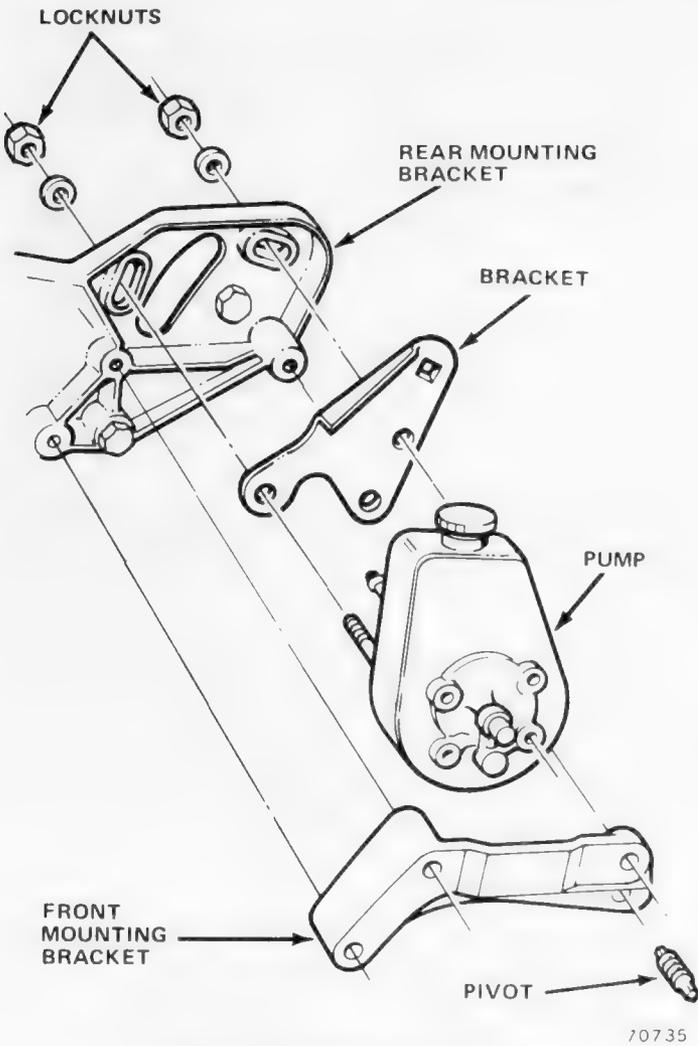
C-18 Power Steering Pump Drive Belt Adjustment—Four Cylinder
